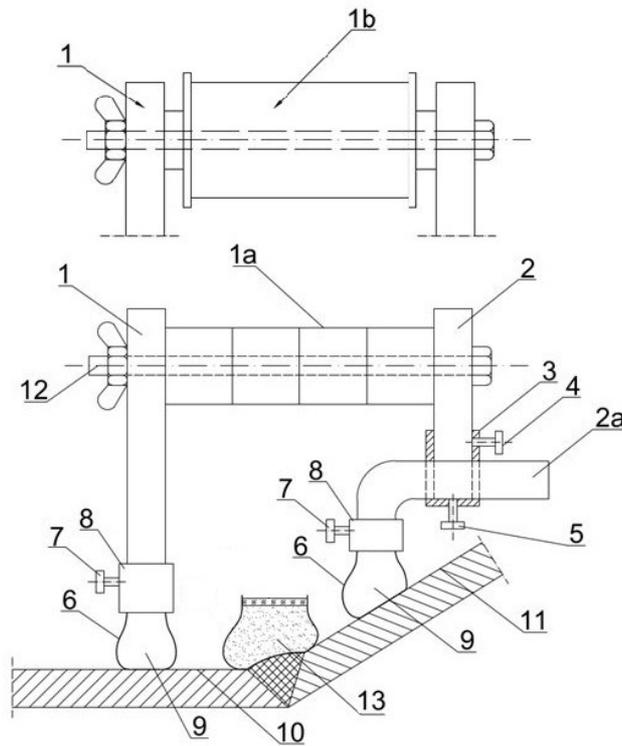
Example of using two non-articulated inductors for diagnosing the weld [11] technical condition. "x" – position of cracks.
